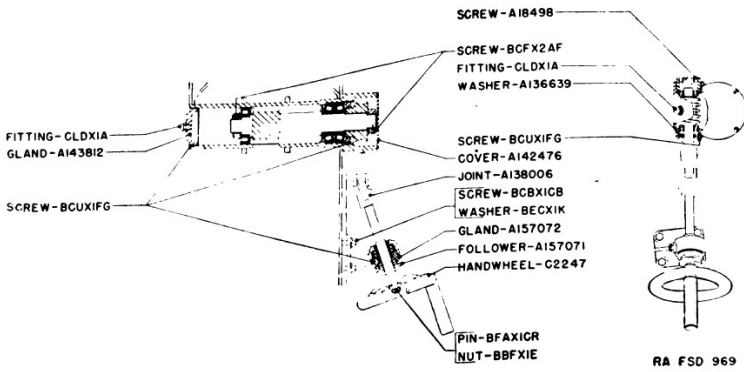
75-mm howitzer carriages, M3 and M3A1—elevating mechanism.
